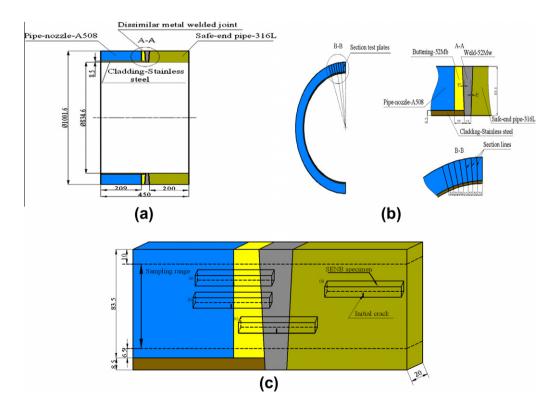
Geometry of a full scale mock up of the DMWJ (a), the DMWJ sizes and method of cutting testing plates from the mock up (b), and the location of sampling SENB specimens from the testing plates (c); the detail of the "A-A" in (a) being shown in (b).
